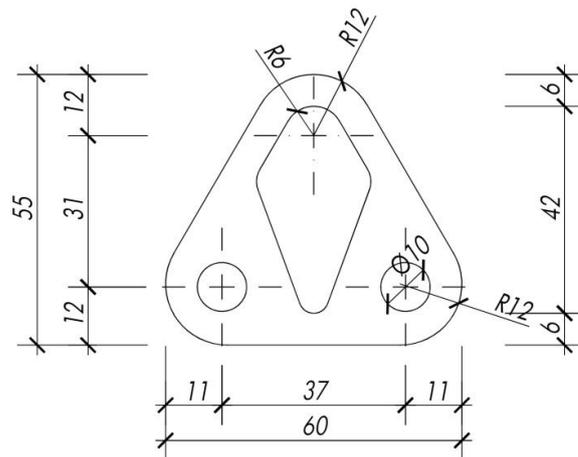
Membrane corner anchoring detail, 2016, Třebešov, [by Jan Vecko]
